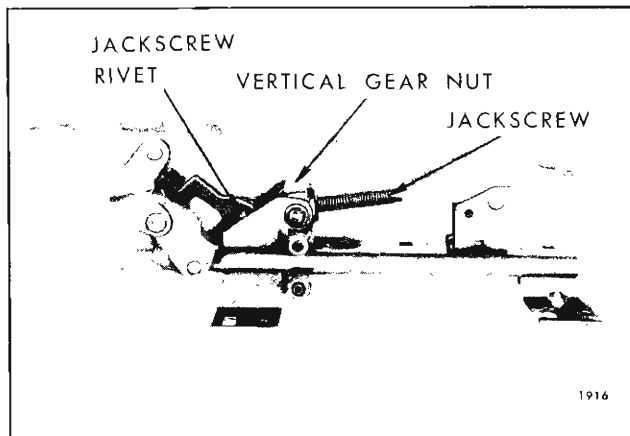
H8—Front Seat Adjuster Four-Way Tilt
